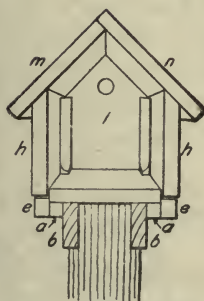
Cross section and interior view of front half of house for swallows and bluebirds.
